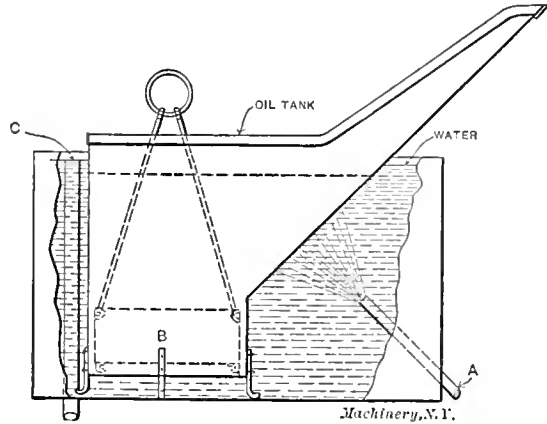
Oil Tank for Hardening Hack-saw Blades.
